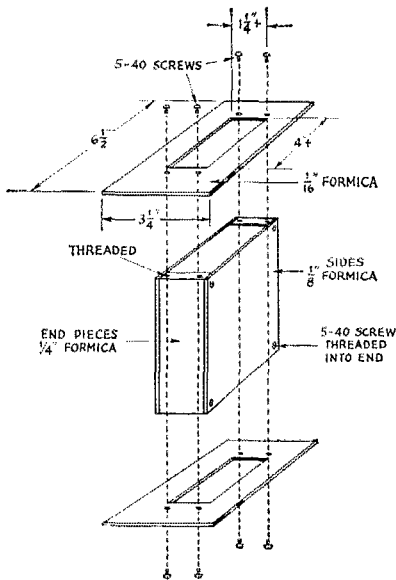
Bobbin construction. The parts are held together by small machine screws threaded into the Formica. The bobbin should be a snug fit for the core, but care must be used to keep its over-all length slightly less than that of the core opening so the two halves of the core can be butted tightly together.
